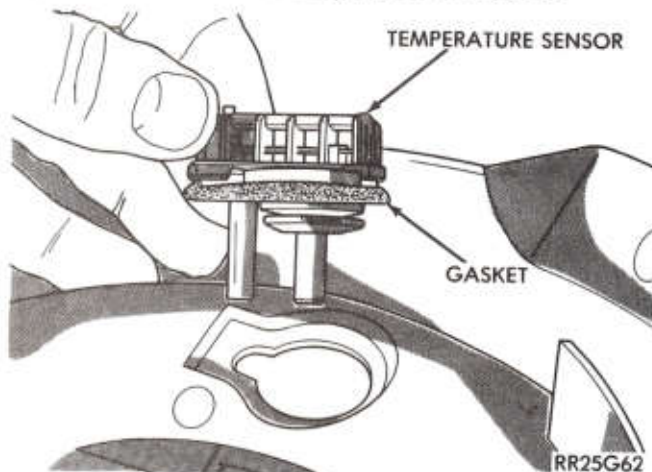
Servicing Sensor (Fuel Injected Engines)
